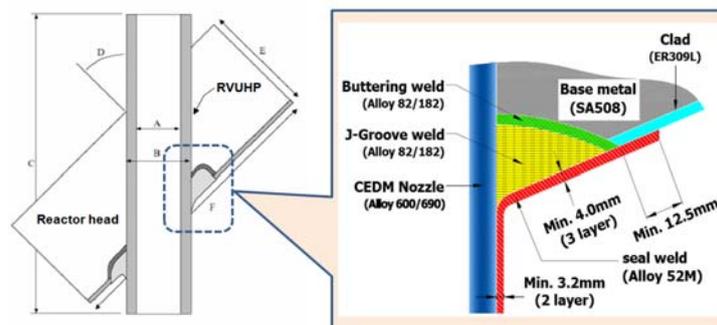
EFR welding design for Alloy 600 J-Groove welds
